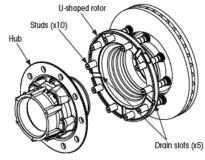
Hendrickson stud mounted hub & U-shaped rotor assembly
